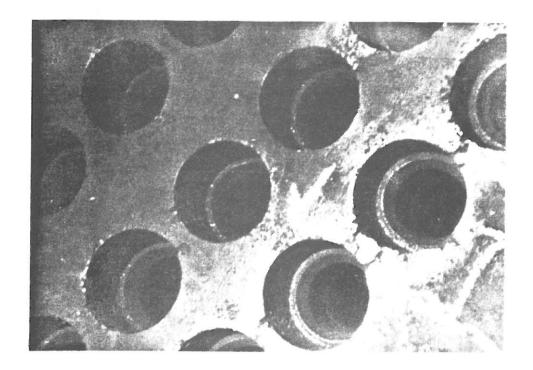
Pitting on inside surface of drum & circumferential link-up of bore hole cracks
